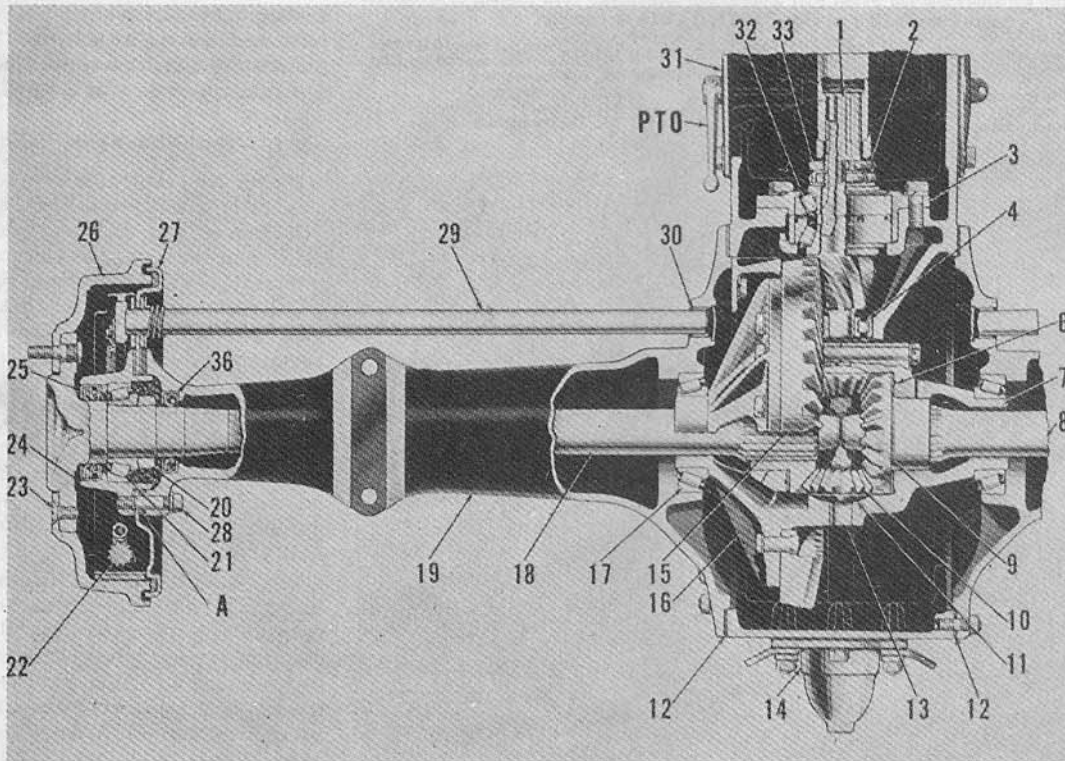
Model TO30 main drive bevel pinion and ring gear, differential unit, wheel axle shafts and housings assemblies. Bevel pinion (1) and ring gear (15) are available only as matched pairs. Note the use of two oil seals (25 & 36) on the TO30 axle shaft. For service, special heat treated bolts and nuts are used for attaching the ring gear to the differential case.
